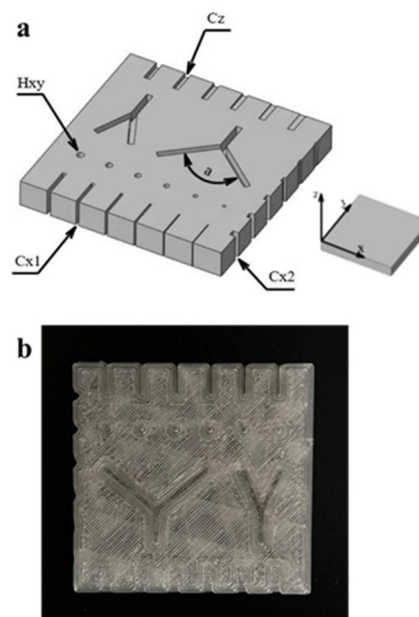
a) CAD design of the Benchmark part showing all the features and print orientation; b) image of a sample of printed parts
